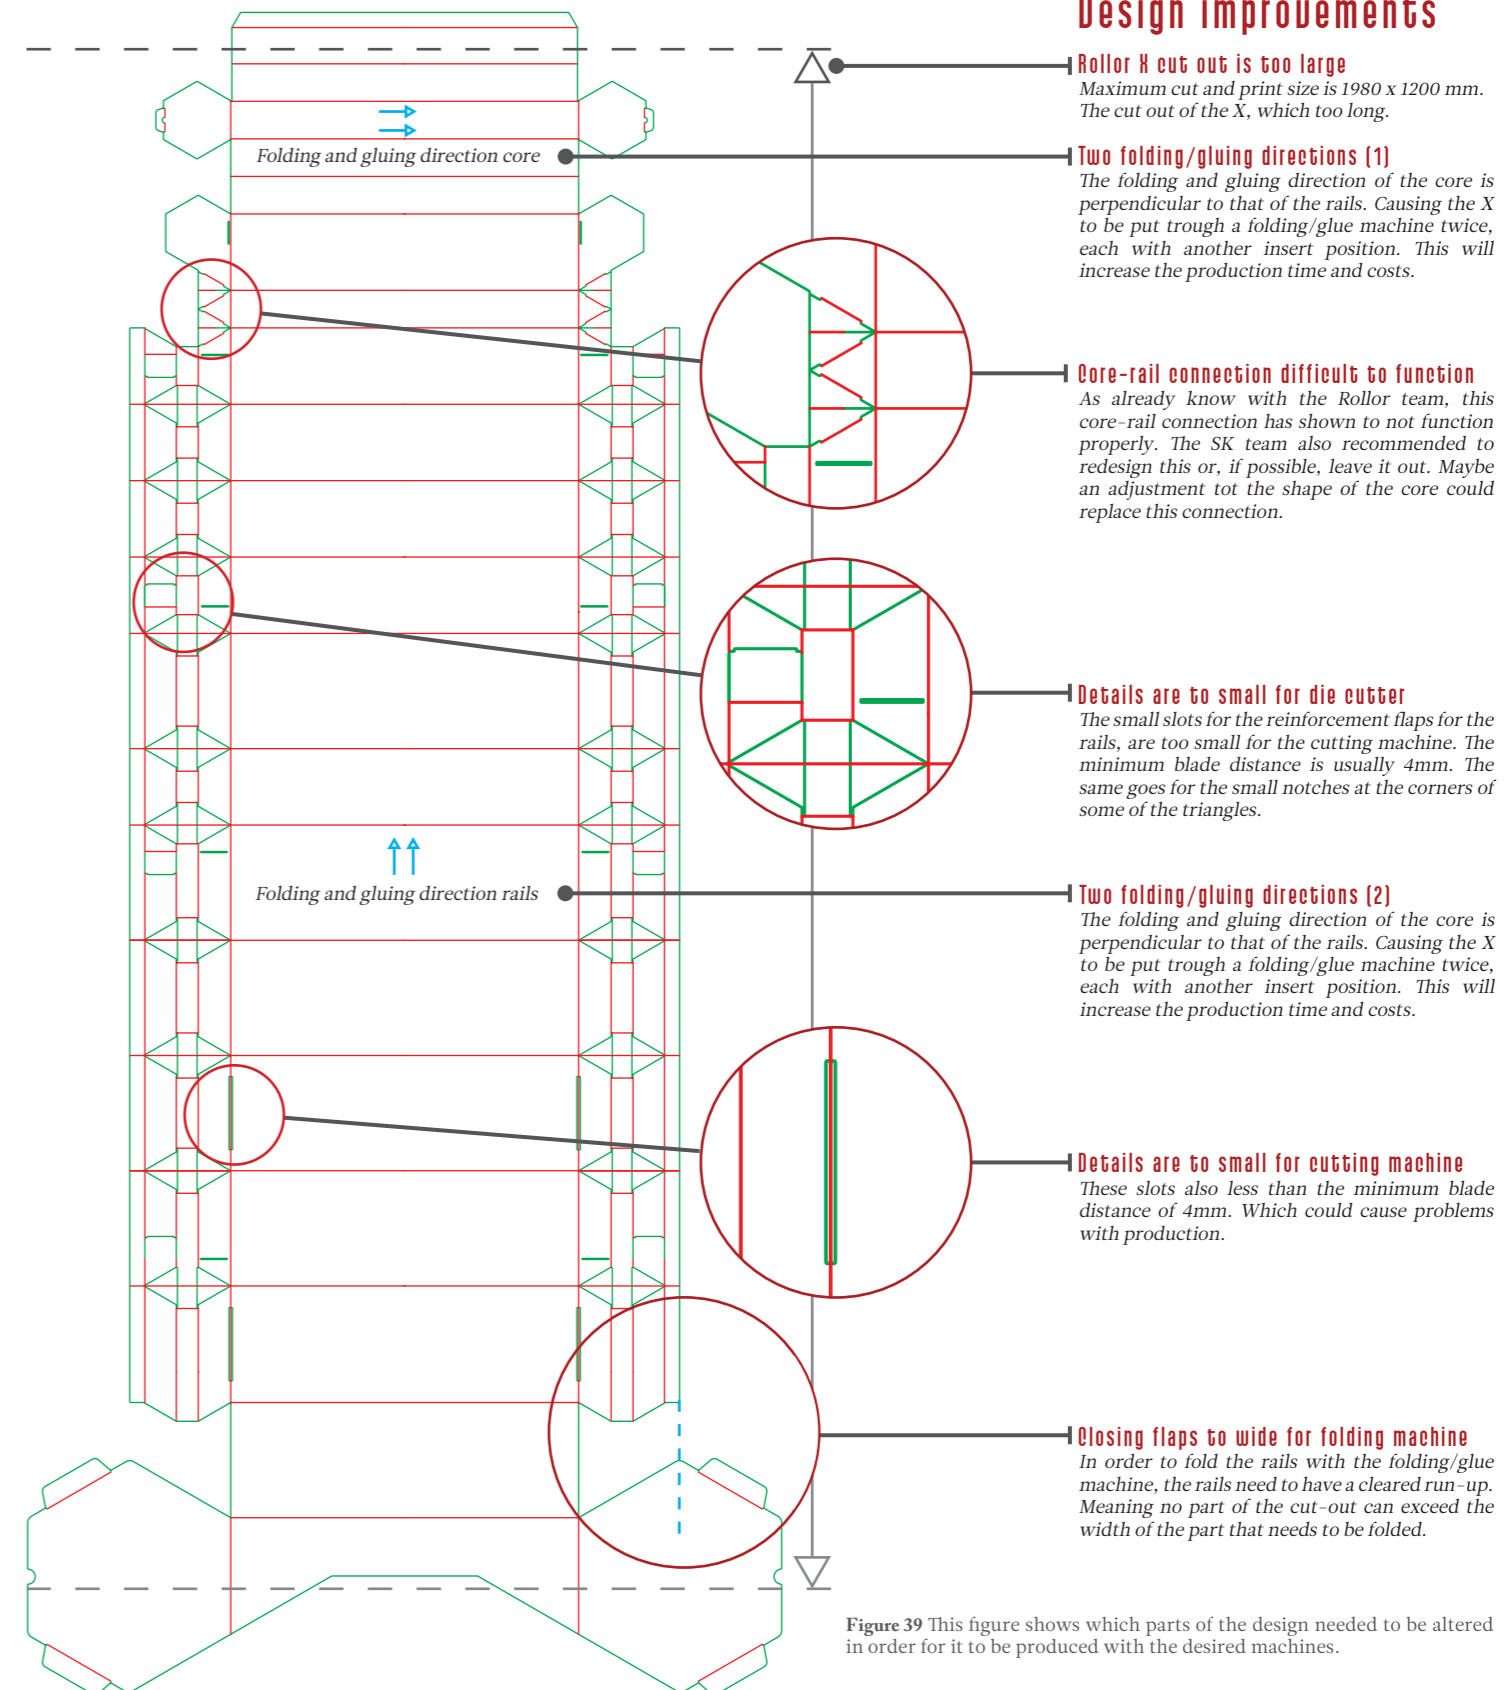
This figure shows which parts of the design needed to be altered in order for it to be produced with the desired machines.
